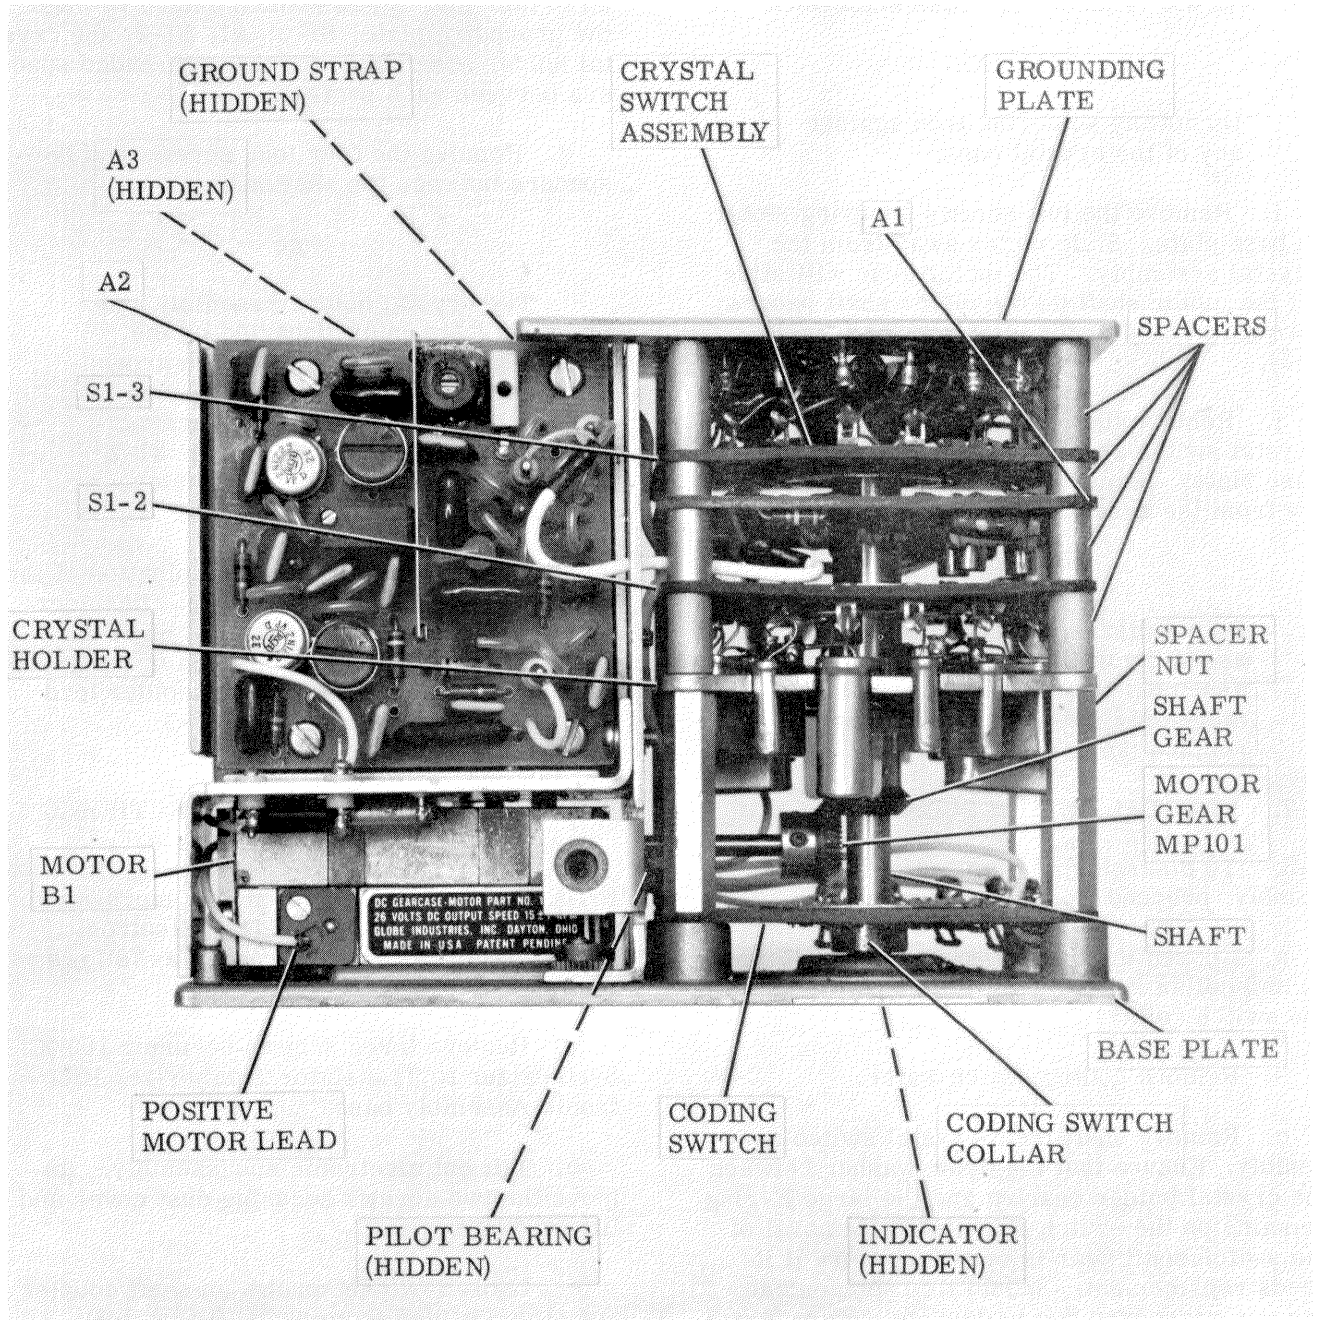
1 MC Synthesizer Electronic Subassembly, Component Location
